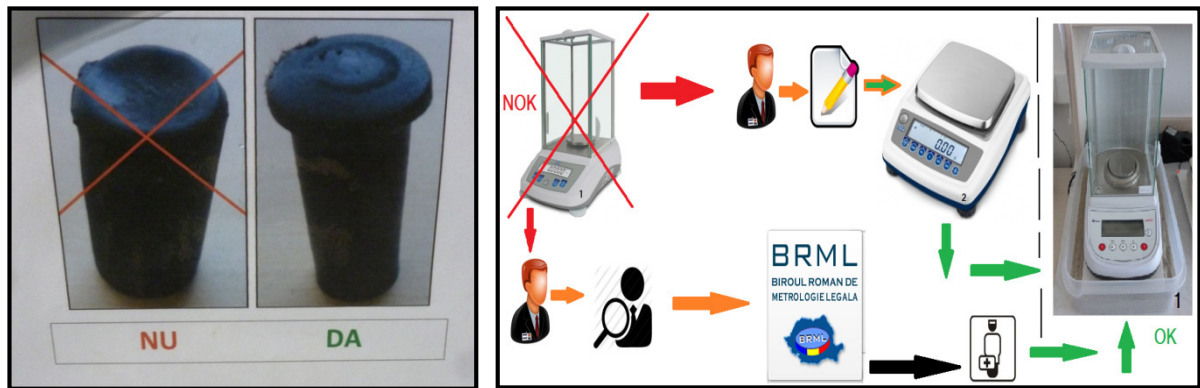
(a) New model of photographic instructions; (b) Mixed model of graphic and photographic instructions
